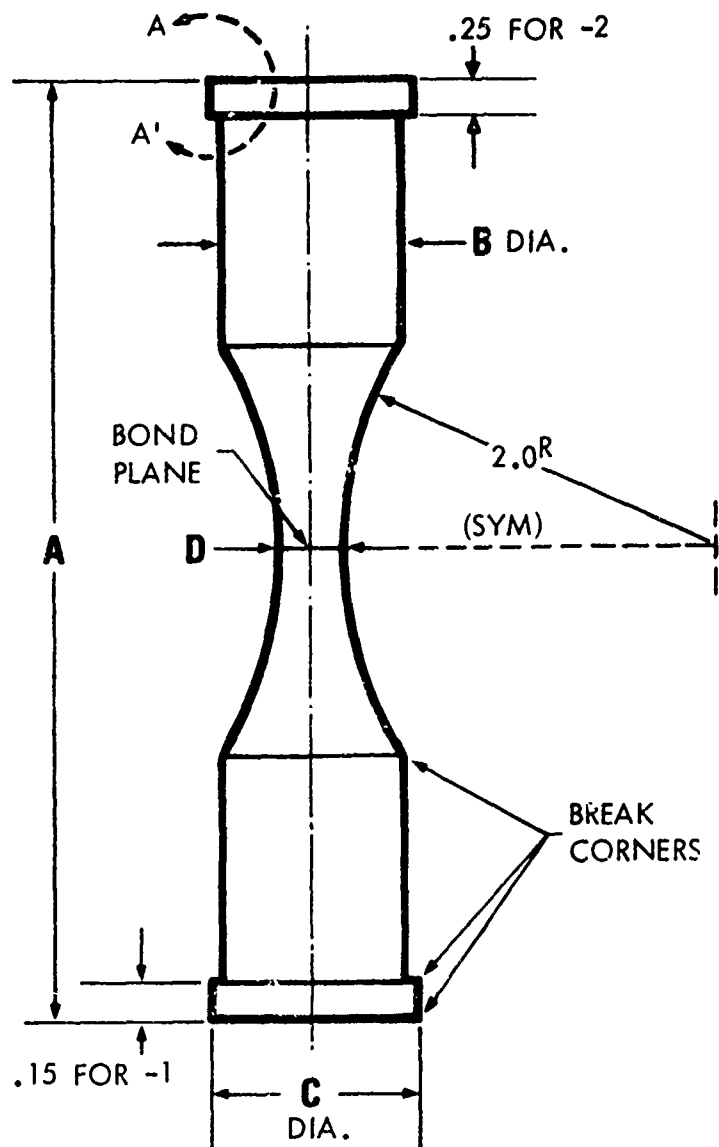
Configuration of Tensile Test Specimen - Collet Grip
